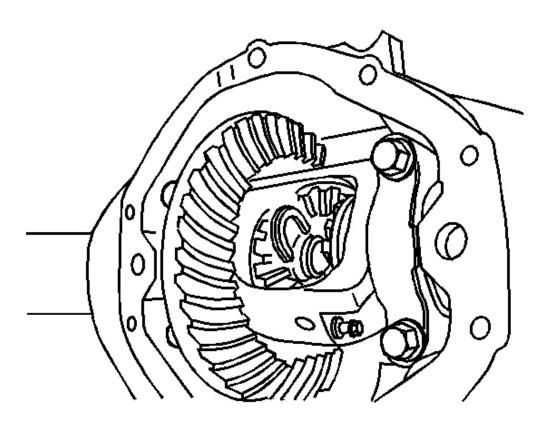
View Of Axle Shaft, Lock & Thrust Block Courtesy of GENERAL MOTORS CORP.
